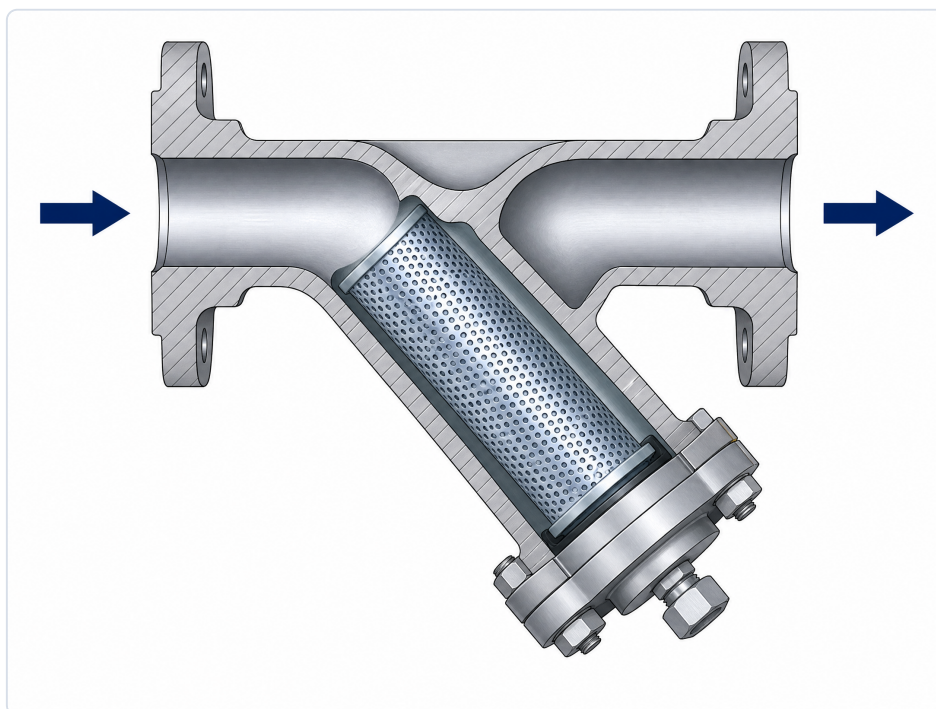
Sectional view of a flanged Y strainer showing flow path through the screen. Flow enters at the left flange, passes through the perforated screen in the inclined pocket, and exits at the right flange. The bolted cover with gasket and blow-off plug closes the screen chamber.
